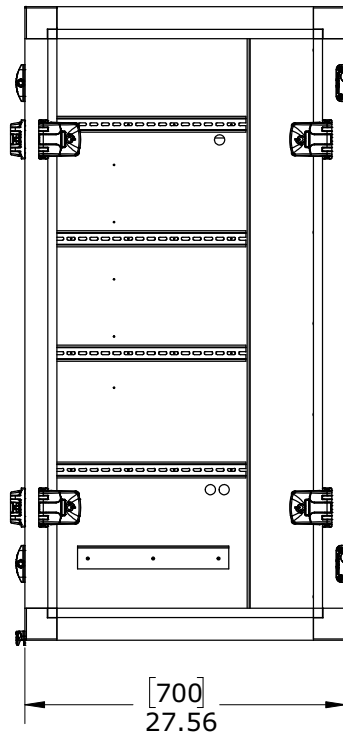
20–80T starter cassette assembly footprint (in inches)
